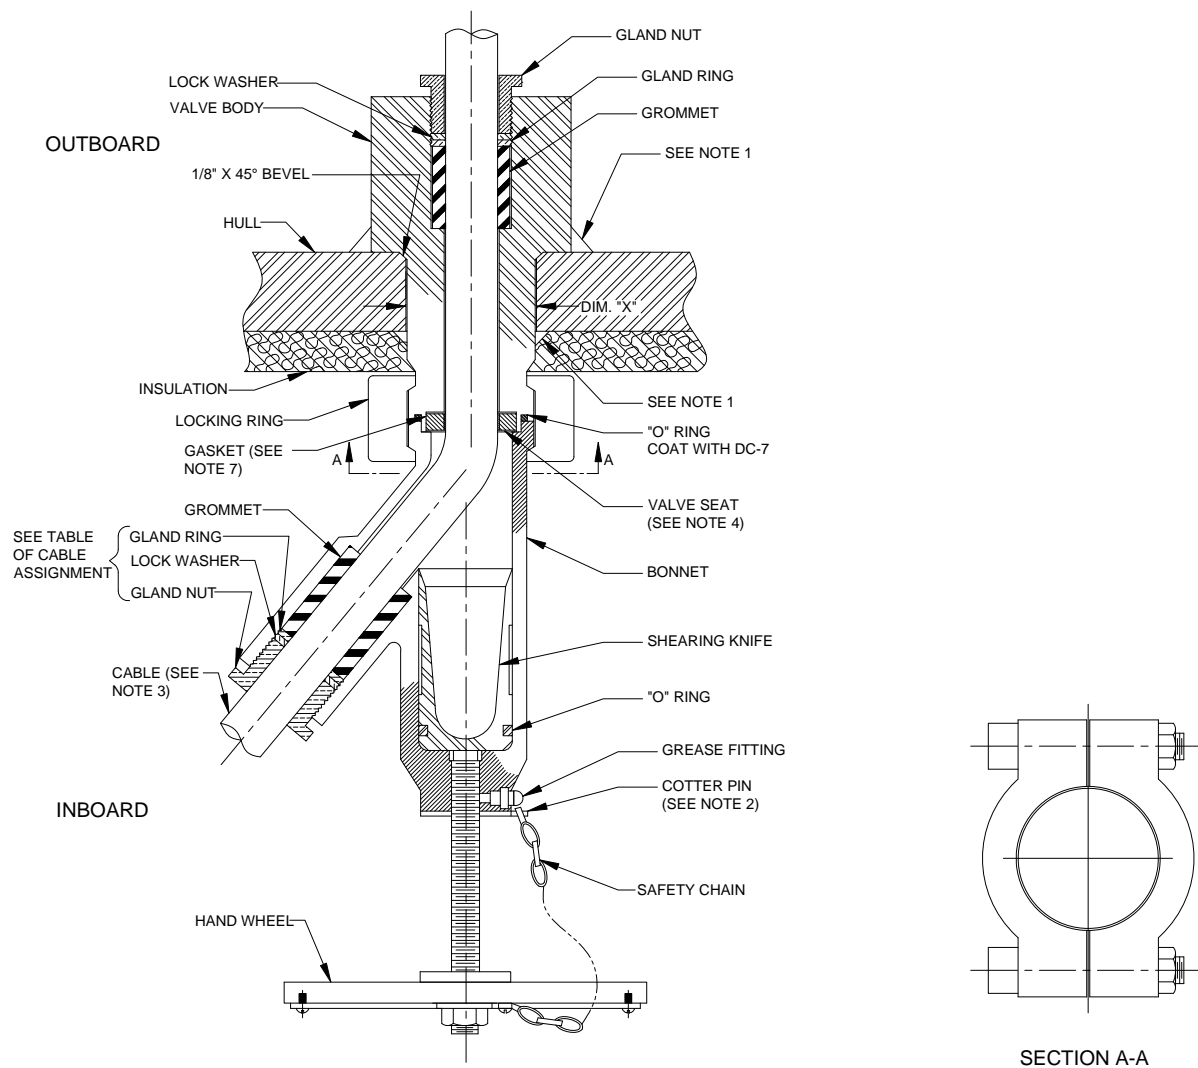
E3. Passing cable through pressure hull of submarines using cable shearing valve.
